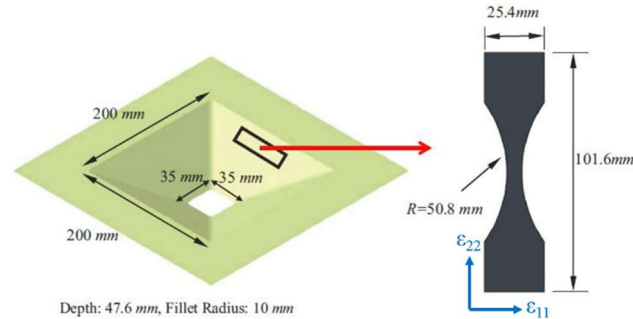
Specimen for fatigue tests (Xu et al., 2014b)
